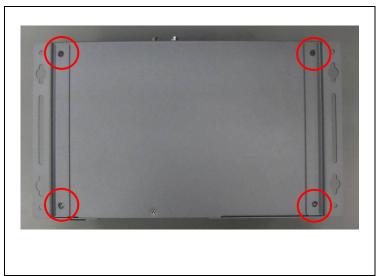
Put mounting brackets on bottom and fasten with four screws.
